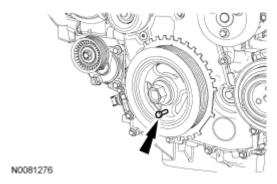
Identifying 6 mm x 18 mm Bolt Courtesy of FORD MOTOR CO.
